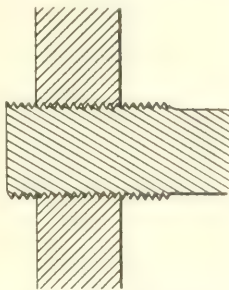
SECTIONAL VIEW OF STAYBOLT.
